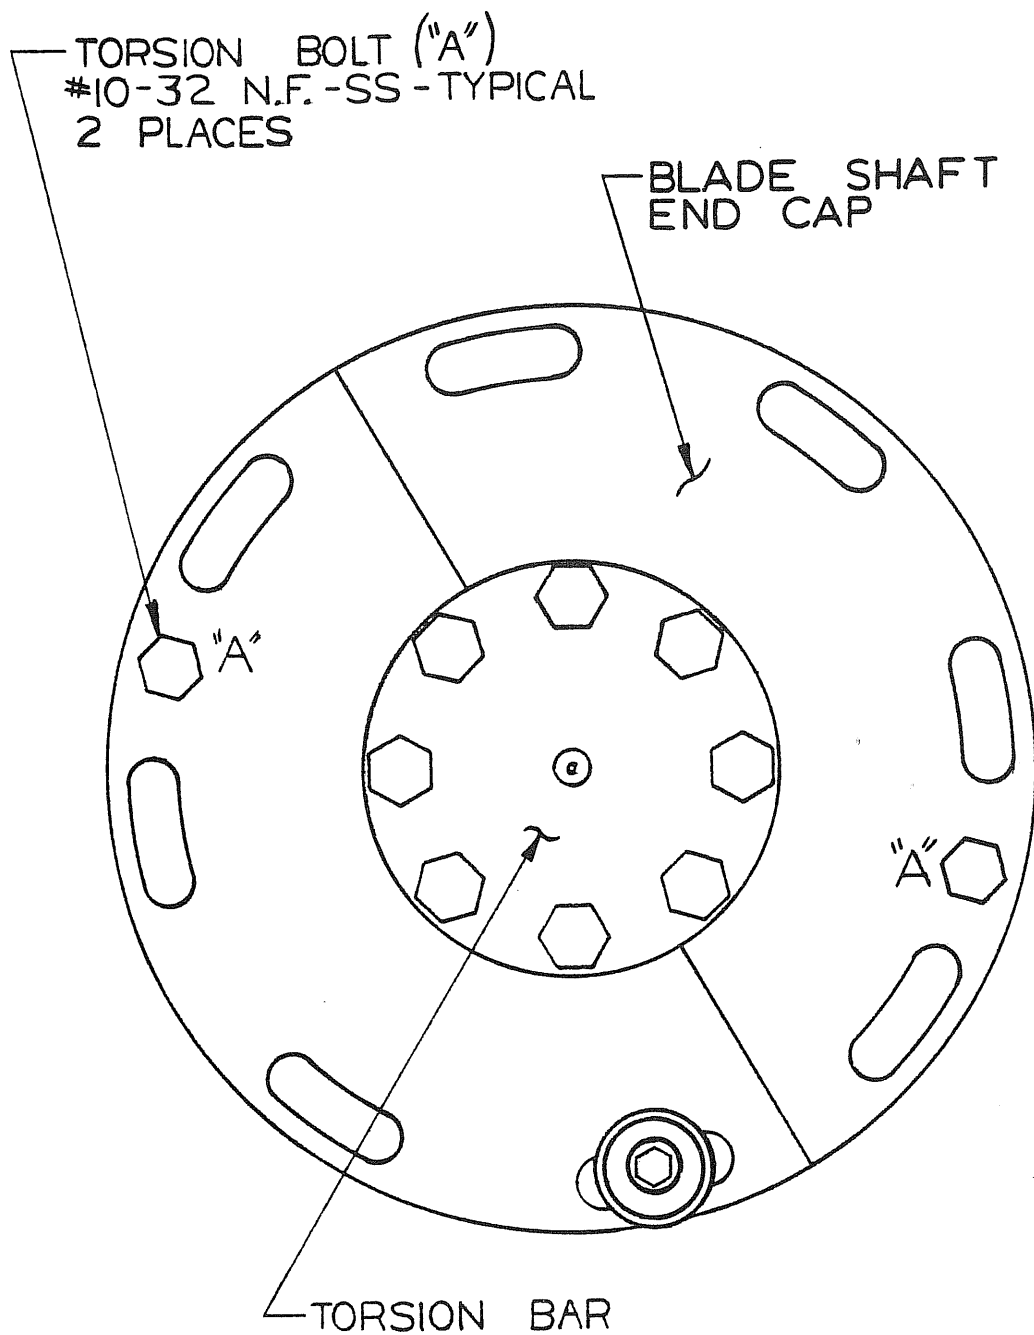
TORSIONAL LOCKING MECHANISM
